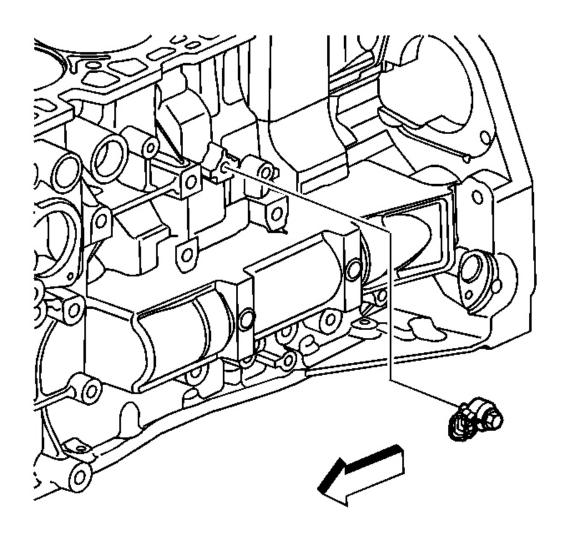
View Of Knock Sensor Courtesy of GENERAL MOTORS CORP.
